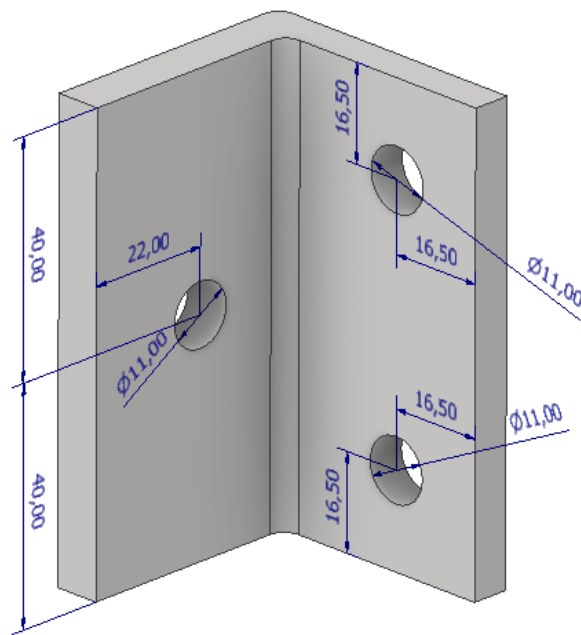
Bolt hole placement and extrusion length for small self-weight + wind L-profile. All bolts are size M10. Dimensions in mm.
